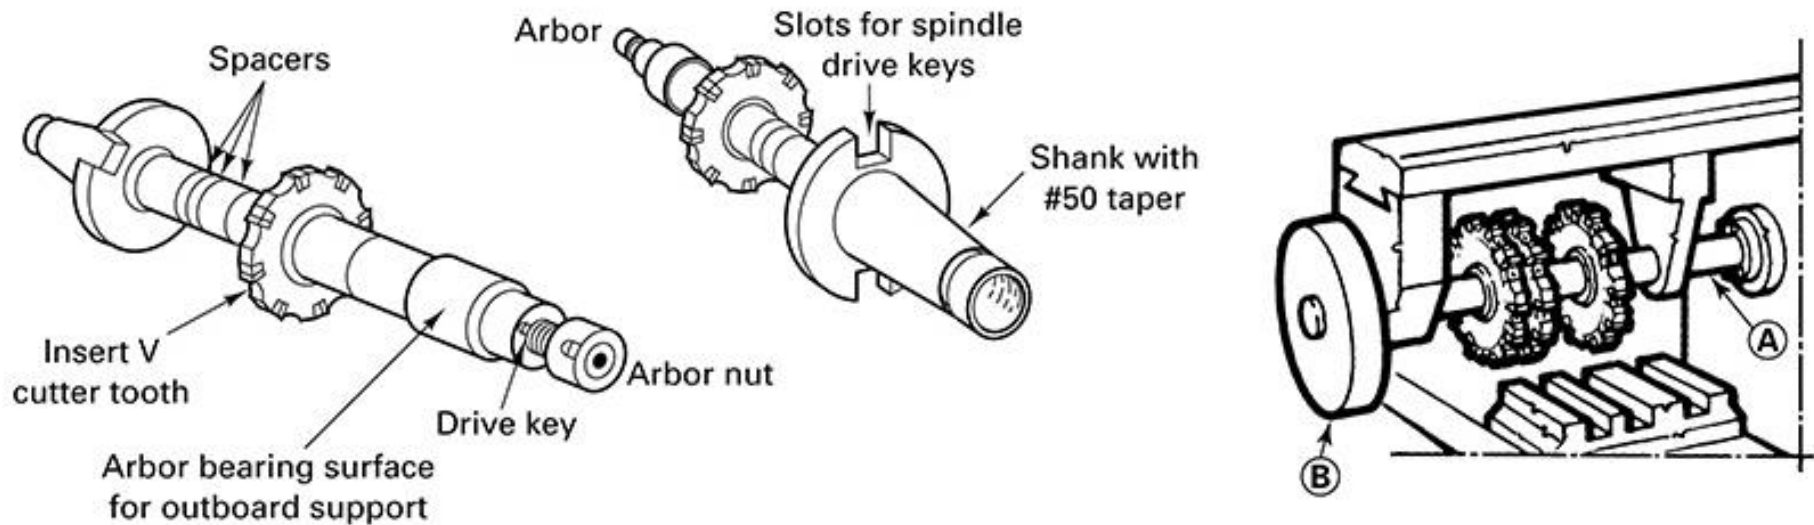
Arbor (two views) used on a horizontal-spindle milling machine on left. On right, a gangmilling setup showing three side-milling cutters mounted on an arbor (A) with an outboard flywheel (B).
